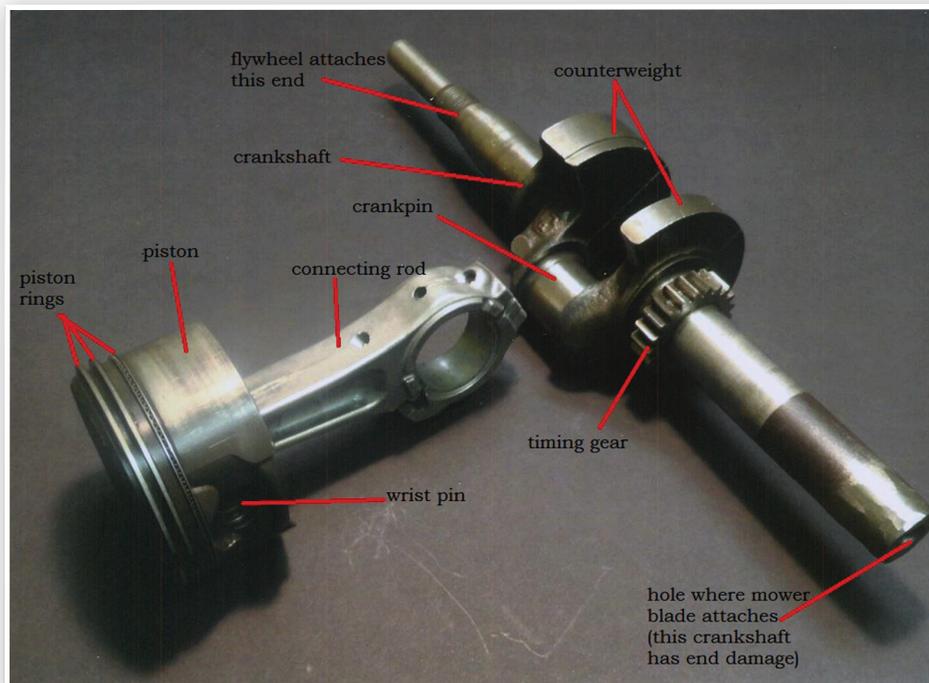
The crankshaft and the piston-connecting rod assembly. The lower end of the connecting rod fits around the crankpin.
